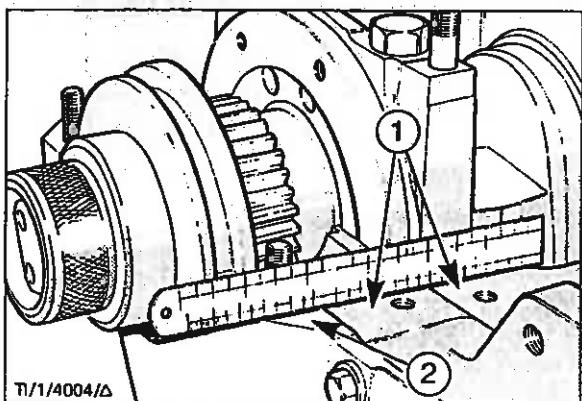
Timing Gear Housing and Cover Alignment (Right Hand Side) on 2728T Engines)
